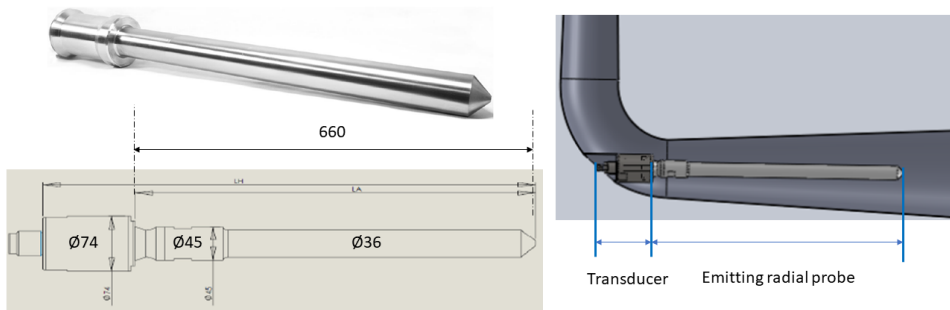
Ultrasound transducer and probe design and positioning in the bend section of the rig. The design is provided by SinapTec Ultrasound Technology and all stated dimensions are given in mm.
